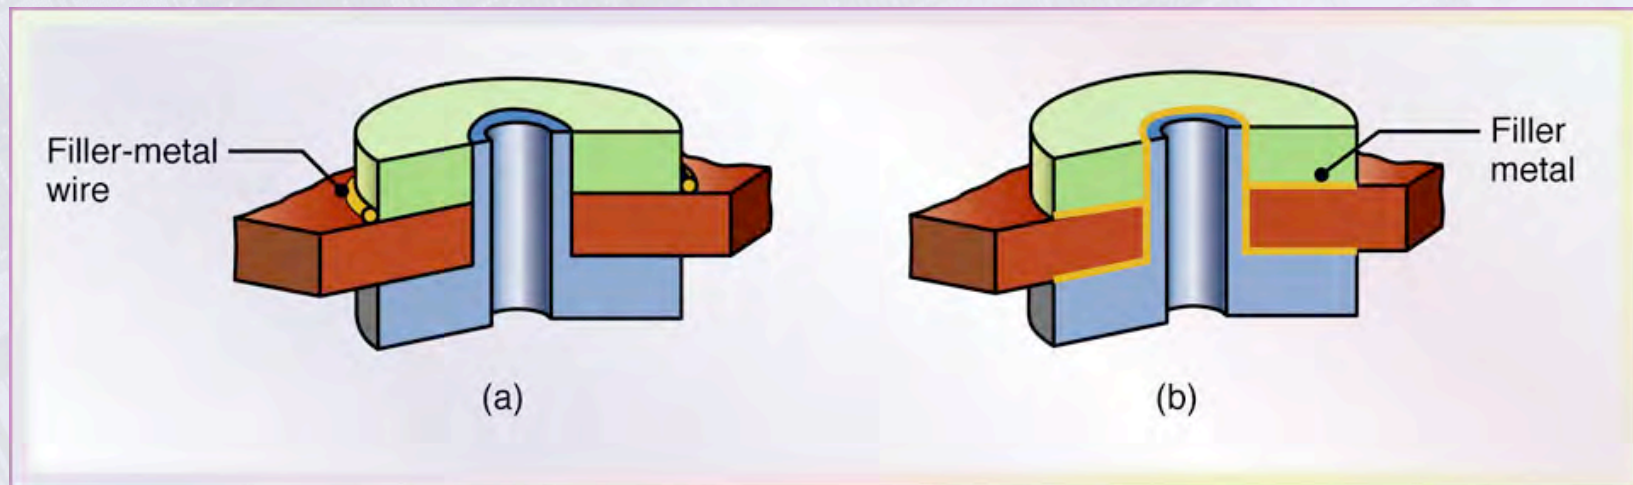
An example of furnace brazing: (a) before and (b) after brazing. The filler metal is a shaped wire and moves into the interfaces by capillary action with the application of heat.
